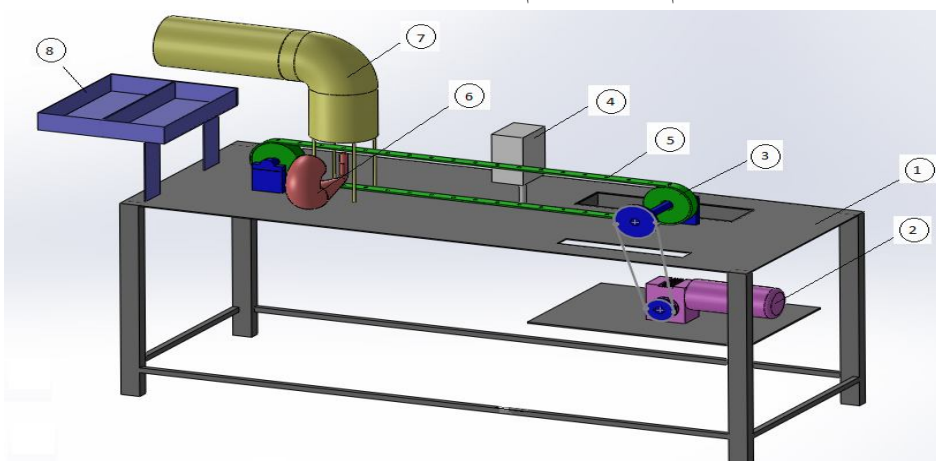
Schematic of stigma separation machine: 1- Chassis and desktop, 2-Motor and Gearbox, 3- Belt and pulley, 4- Cutting unit, 5-Flower seat, 6- Blower, 7- Aerodynamics separator, 8- Tray.
